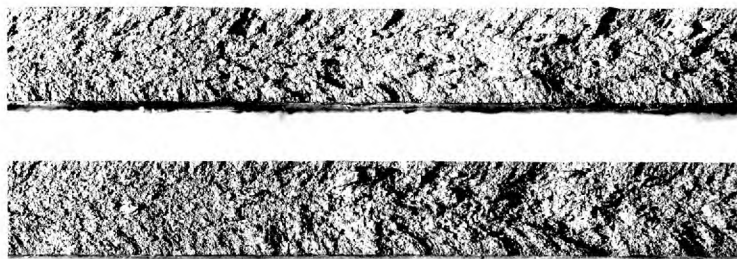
Fracture surface of a specimen broken at 14°C
